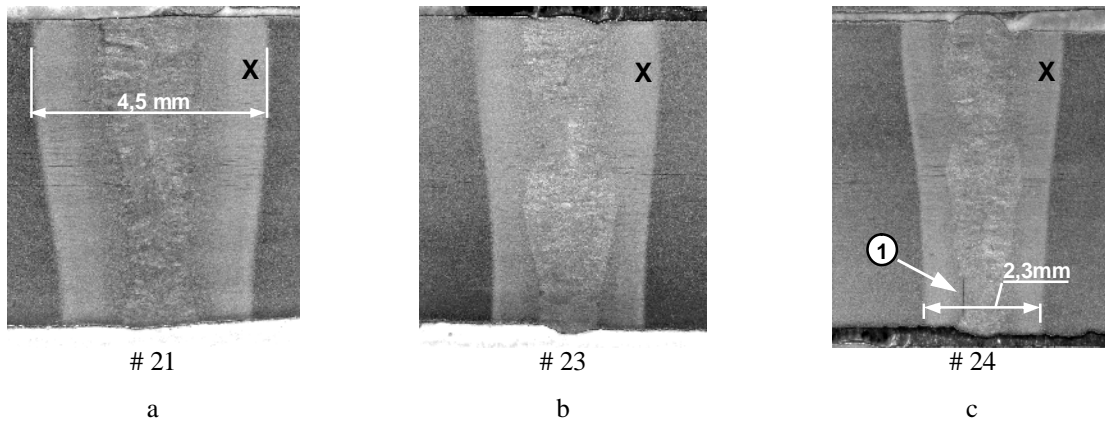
Laser-made welds of S1100QL steel (description in test) – parameters of welding in Table 2
